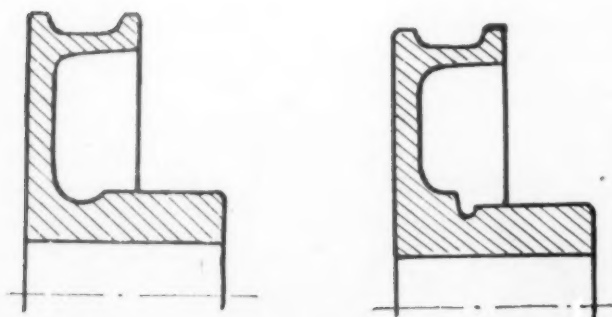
CORRECT WAY (RIGHT) TO RIG FOR CORE ON UNDERCUTTING PART. THIS WAY WITH RECESSON MACHINED OUT PREFERABLE TO UNDERCUTTING CORE ON LEFT.
